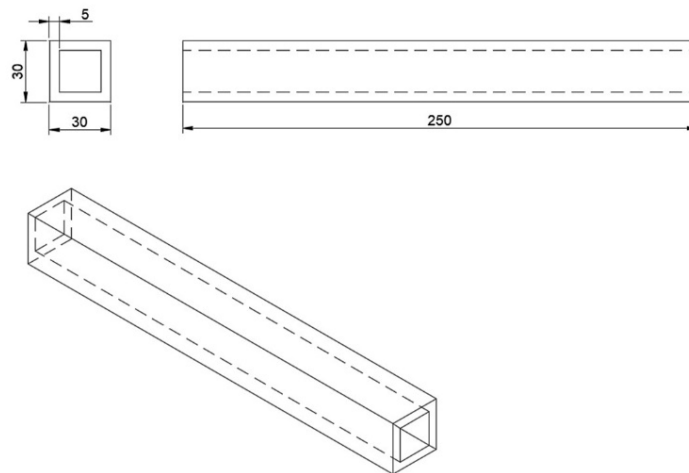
Fabrication Dimensions of Hollow Shaped Beam (All Dimensions are in mm).
